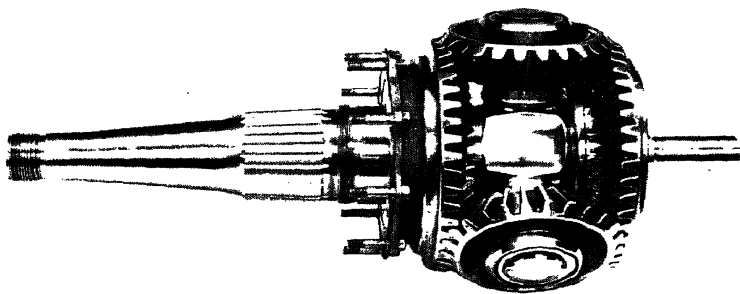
Airscrew reduction gear of Bristol "Mercury" engine.
